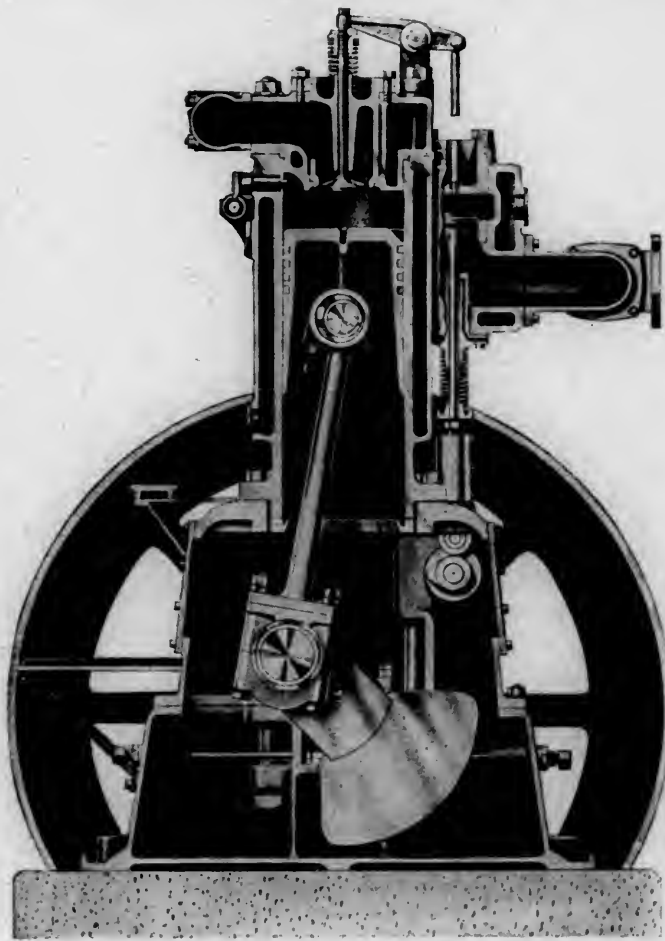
SECTIONAL VIEW OF FAIRBANKS-MORSE GAS ENGINE.
